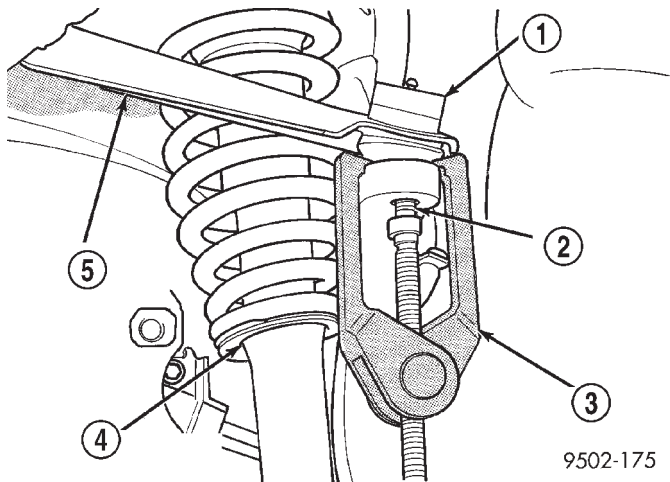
Ball Joint Stud Removal From Steering Knuckle
